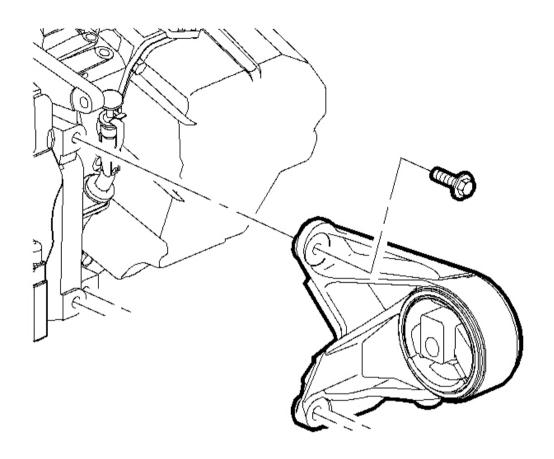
Transmission Mount & Bolts Courtesy of GENERAL MOTORS CORP.
